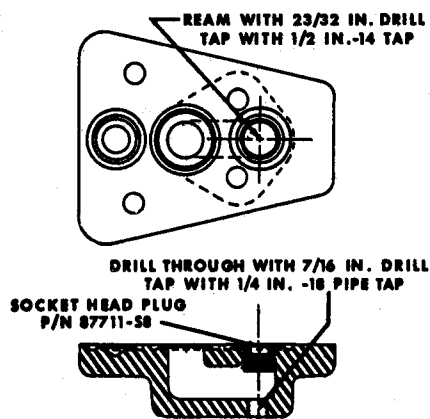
On models not equipped with remote control valve, manifold plate must be modified as shown above to permit checking hydraulic system relief pressure. Refer also to Fig. 207.
